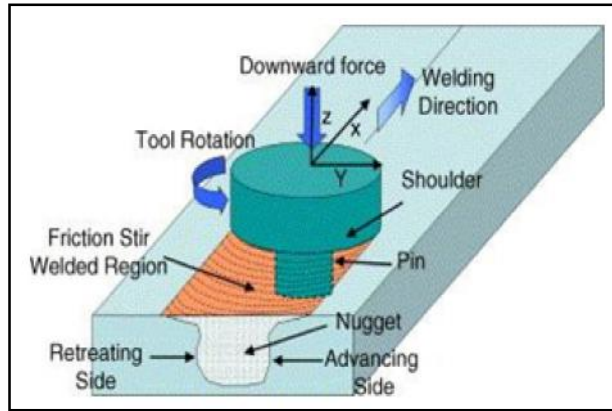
Schematic of the friction stir welding and tool shape
